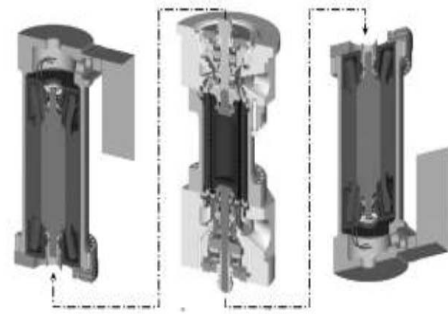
Cross Section of Left; upper motor, Center; hydraulic section, Right; lower motor
